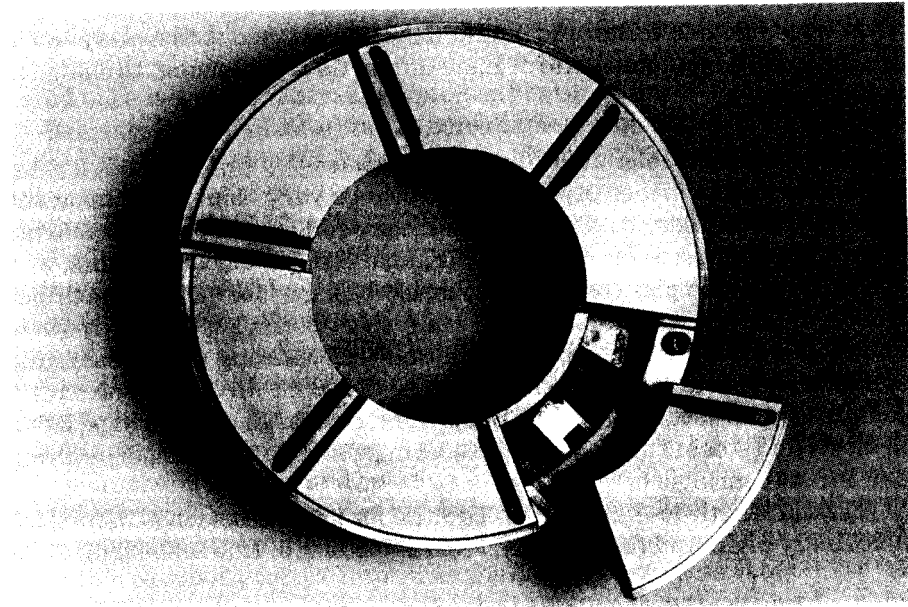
Six-shoe thrust bearing with LEG but without lift.
